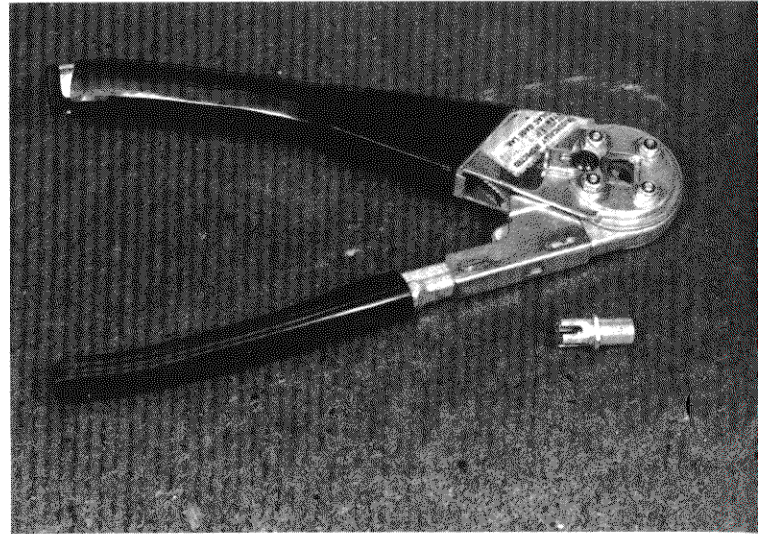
L525C19-300 Crimping Tool with -306 Locator
